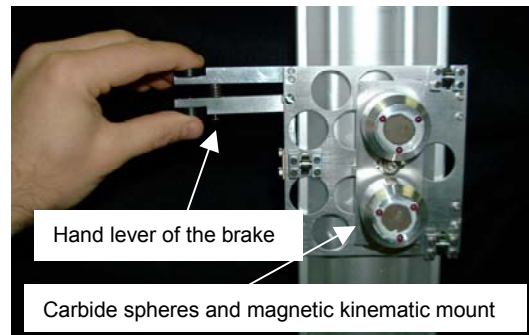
A hand lever is used to disengage brake mechanism before repositioning the carriage.
